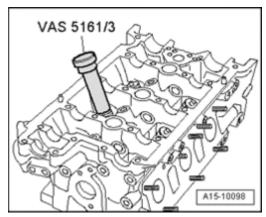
Placing Drift VAS 5161/3 On Valve Spring Plate And Loosening Stuck Valve Keepers Using Plastic Hammer
